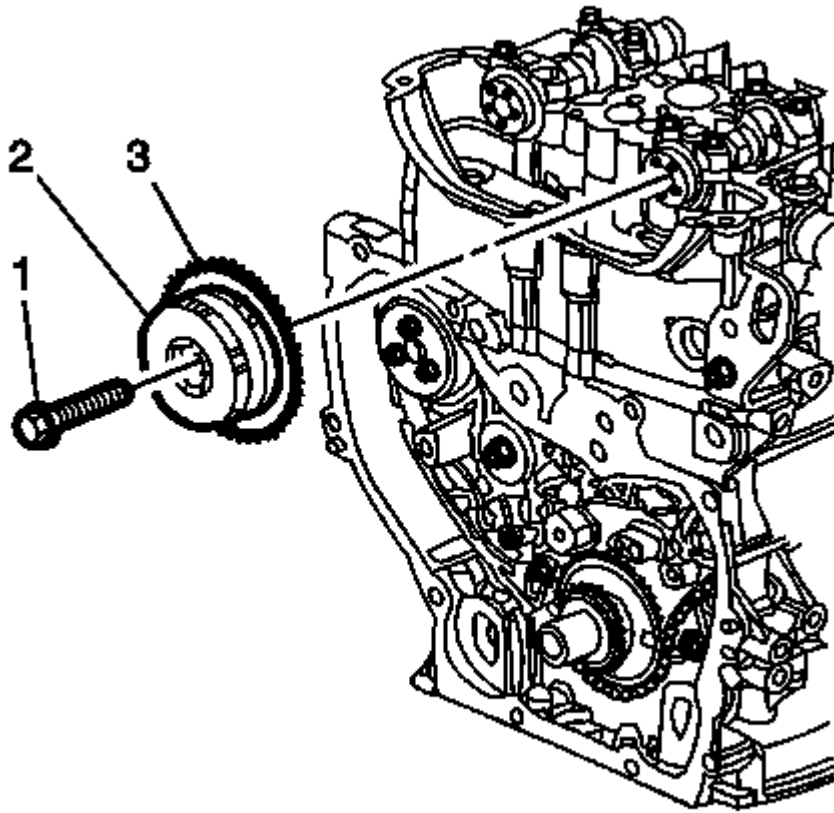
Identifying Timing Chain & Intake Camshaft Actuator
